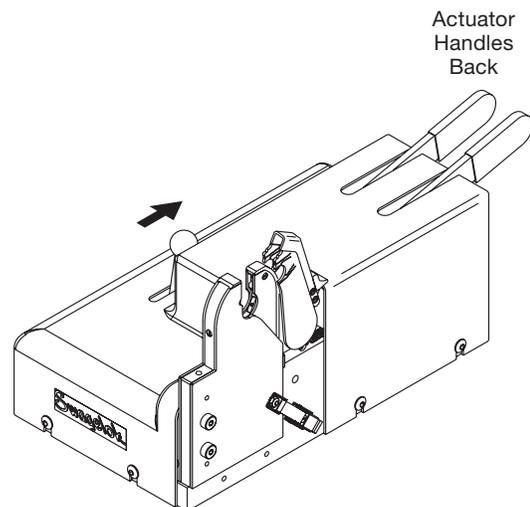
Positioning the Weld Head for a Tool Change
